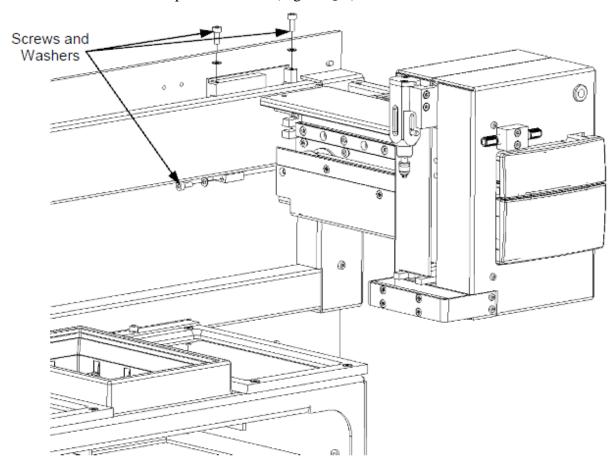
Removing the Reagent Pipettor Y & Z Drive Assembly
